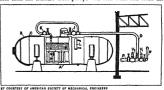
MECHANICAL DRAWING OF A COMPLETE ACCUMULATOR IN-STALL ATION
